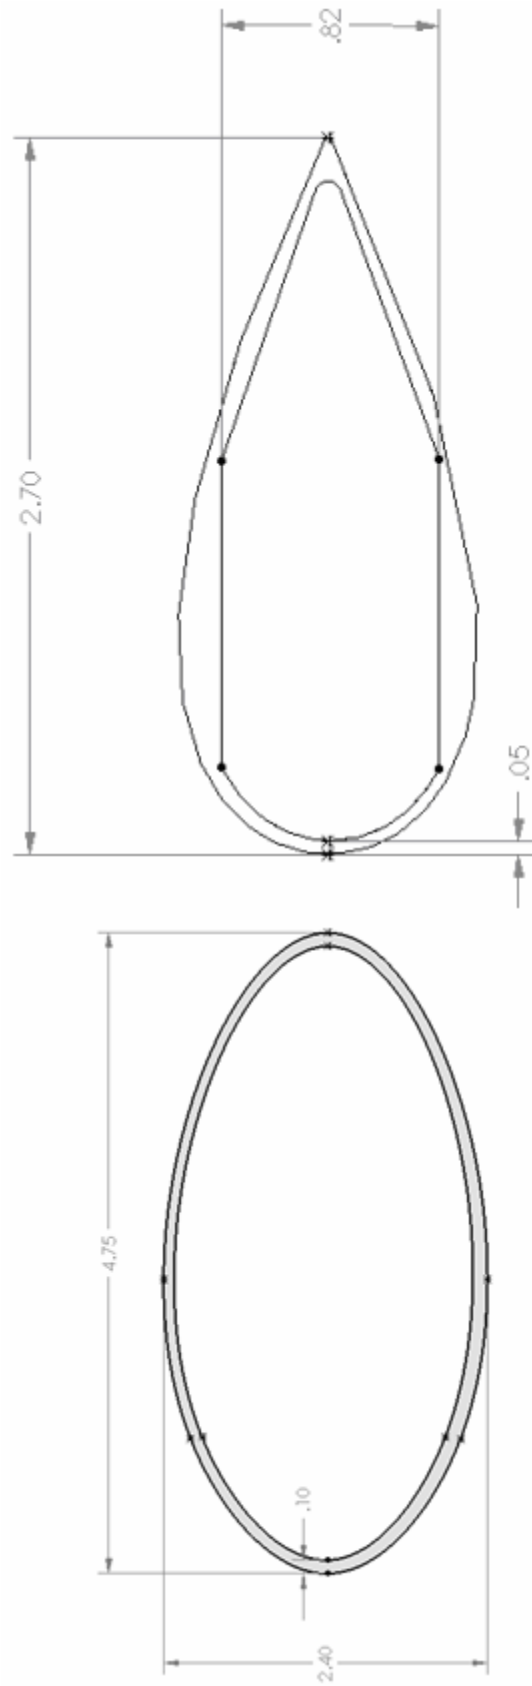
Strut Profiles; Cessna 172 (Left), Fairing (Right)
